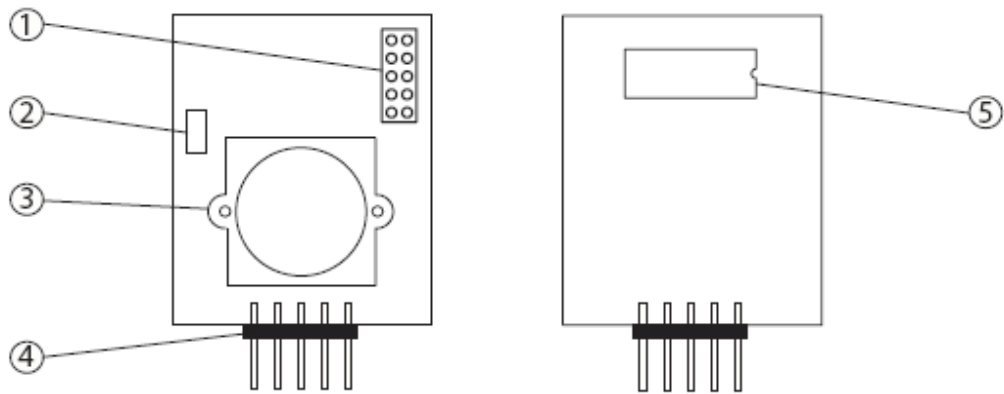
Detail of the HemLinCam Module - front and rear view
